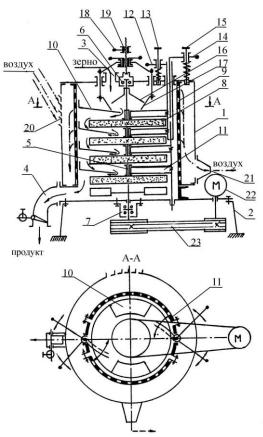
The Functional Scheme of the huller-polisher machine: 1 – housing; 2 – frame; 3 – inlet pipe; 4 – outlet pipe; 5 – vertical shaft; 6, 7 – support bearing anchors; 8 – abrasive wheels; 9 – grating cylinder; 10 – guiding sectors; 11 – adjusting scrapers; 12, 14 – steering control; 13, 15 – lock; 16 – guiding cone of grain; 17 – funnel of material; 18 – steering control of funnel adjustment; 19 – adjusting nut of the funnel position; 20 – aspiration shutters; 21 – clogged air suction device; 22 – electric motor; 23 – V-belt transmission
